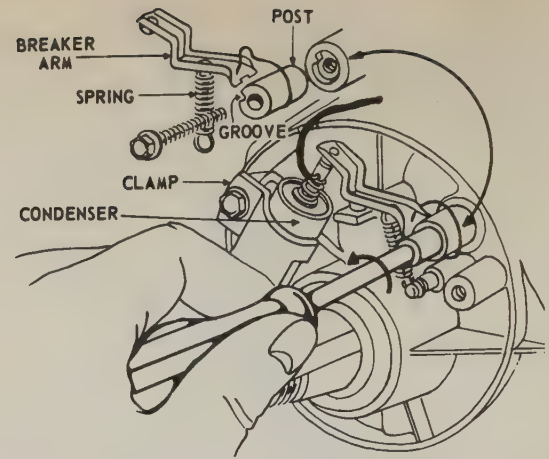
On this design, the breaker-point assembly is removed by loosening the screw holding the post. The condenser, with stationary point, is removed separately by loosening the condenser-clamp screw. (Briggs & Stratton Corporation)
